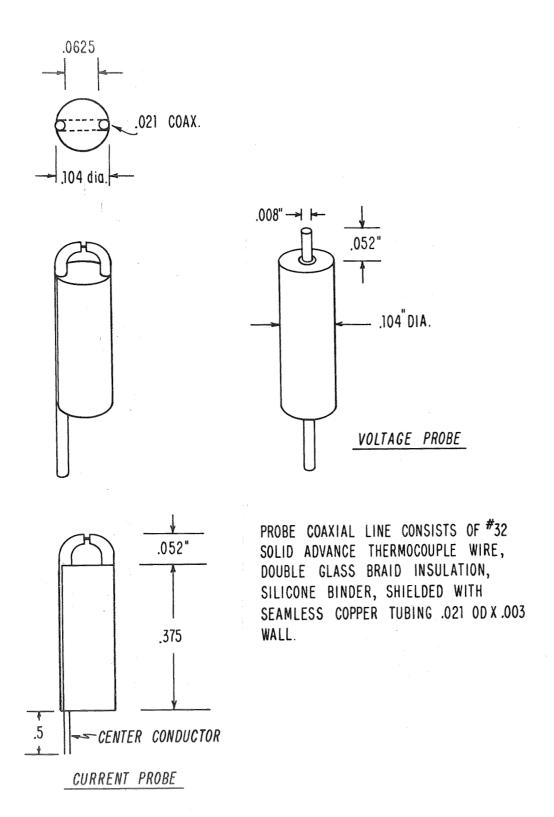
DETAIL OF PROBE ASSEMBLIES
